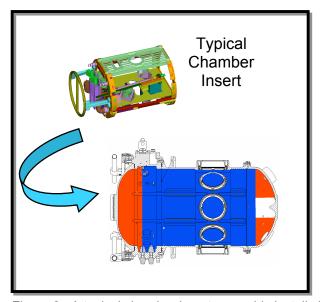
A typical chamber insert assembly installs into the combustion chamber through the front end cap.
